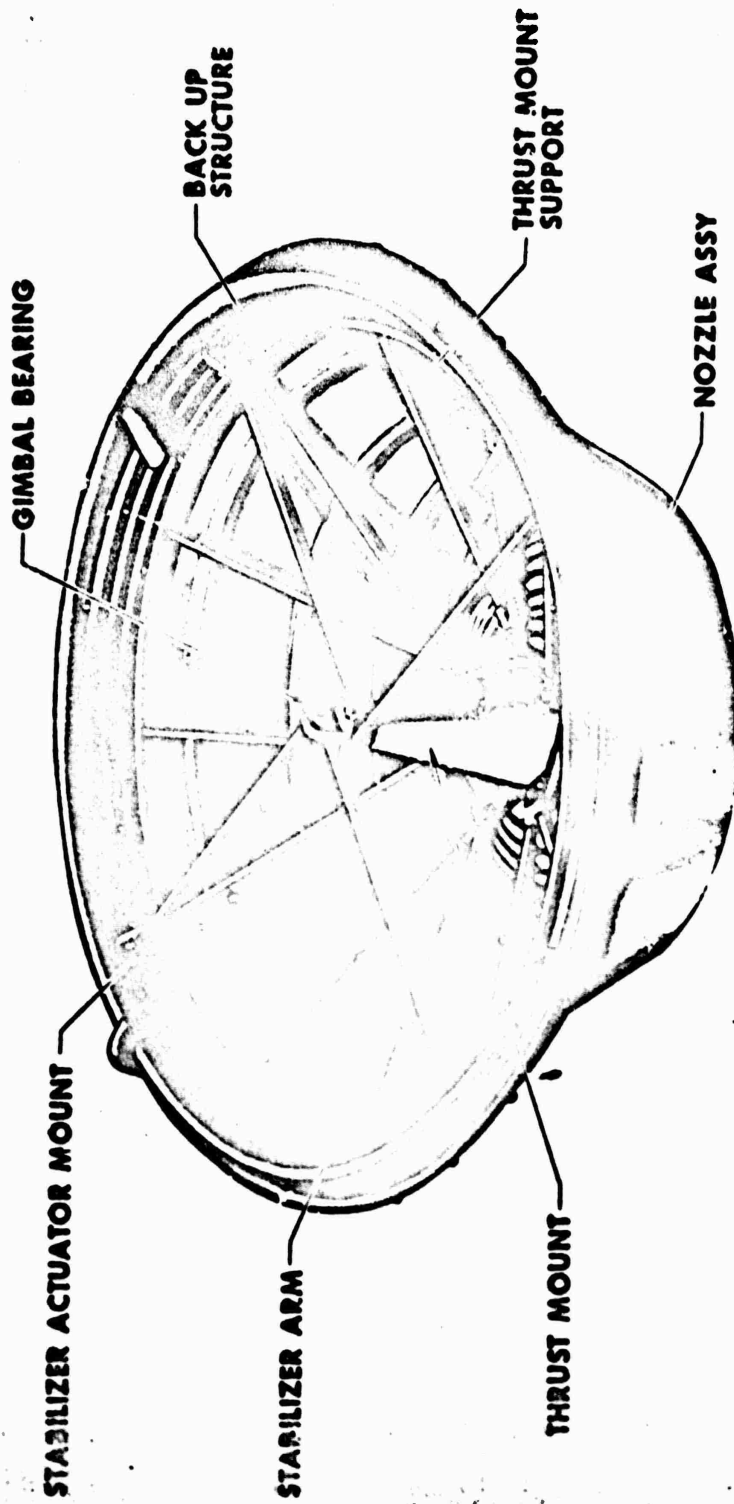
25,000-Pound-Thrust Demonstration Thrust Chamber Assembly
